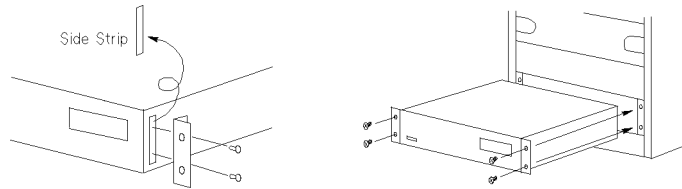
Rack Mounting the Controller (Option 705 and 706)
